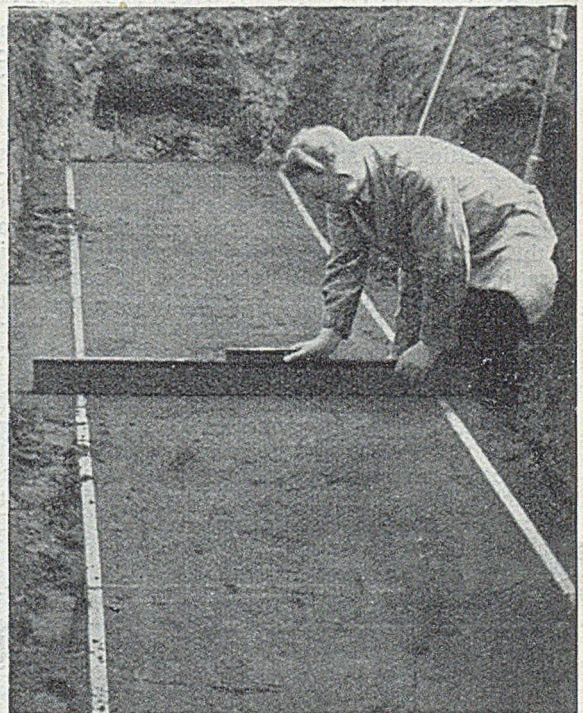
Checking Camber in the Bed for a Large Mould.
